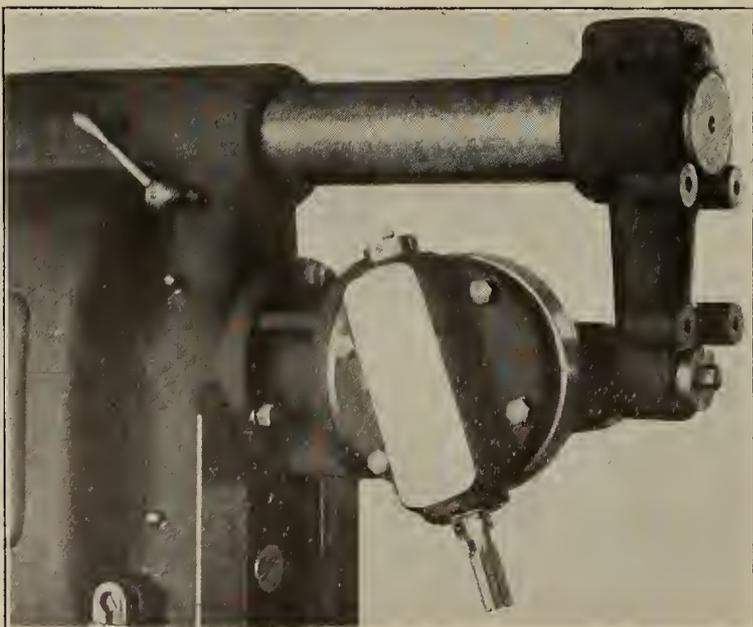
UNIVERSAL MILLING ATTACHMENT.
